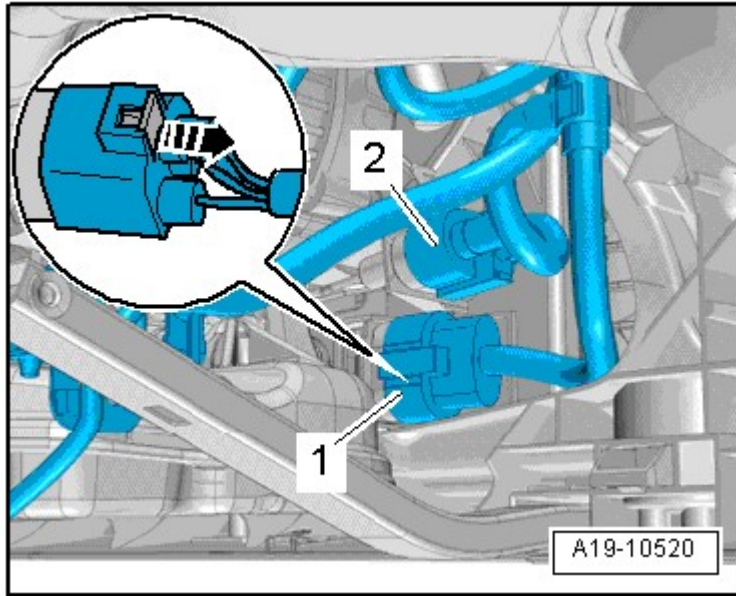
Identifying Coolant Fan Electrical Connectors -1 And 2-
